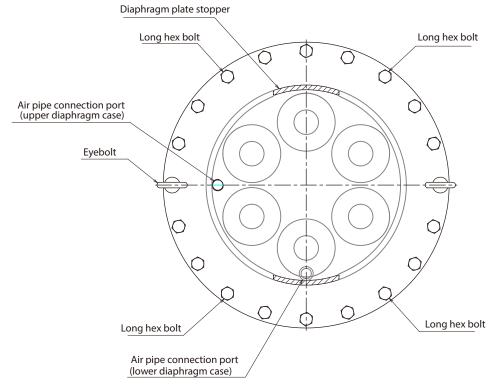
Reverse-action PA3/PA4 actuator parts positions
